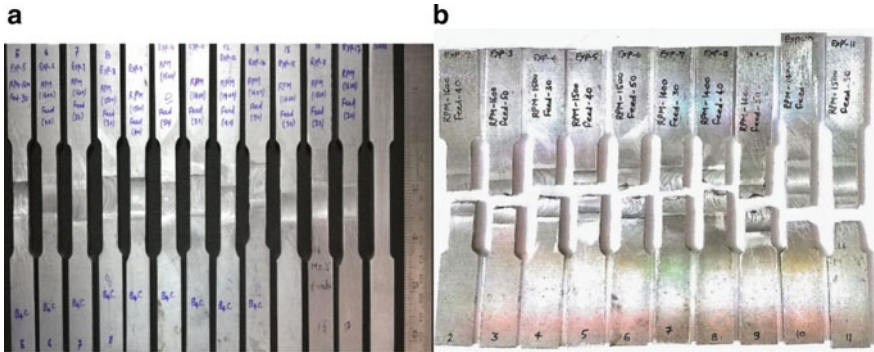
Non-corroded tensile specimens: a before test, b after test
